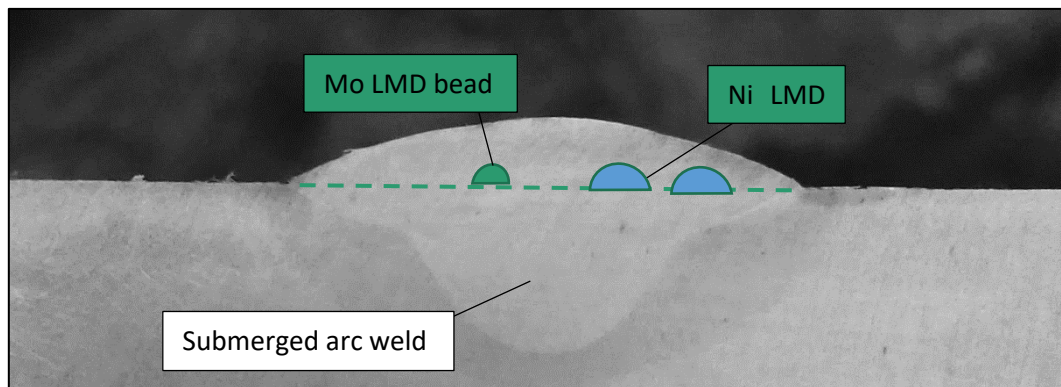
Micrograph of a cross section of a weld, with a superimposed schematic of LWD beads. This schematic is representative of Weld 4. The plate was 20 mm thick.
